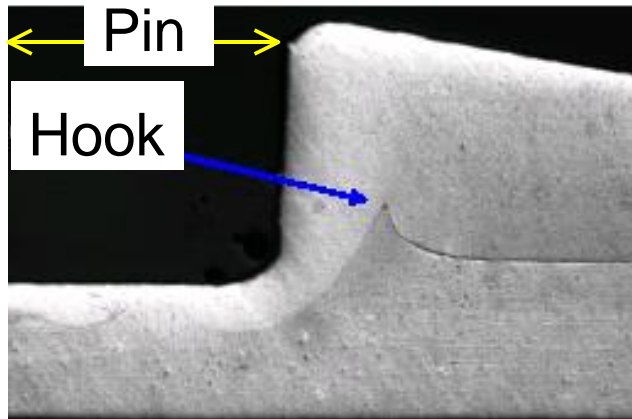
Vertical cross section of FSSW weld specimen for triangular pin (Badarinarayan et al., 2009a)
